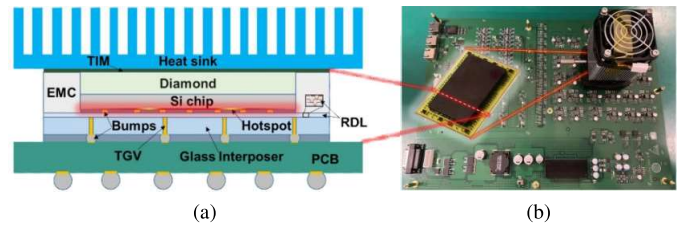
(a) Schematic structure and (b) photograph of the PCD-on-chip-on-glass interposer package. Reprinted from [17], ©2024 IEEE.
